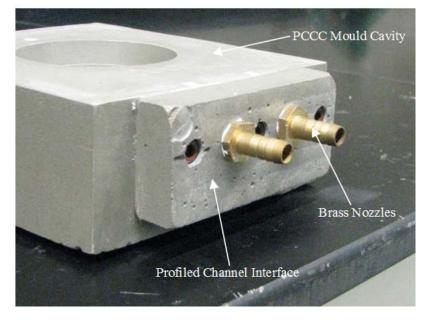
Profiled Channel Interface bolted with PCCC Mould Cavity
